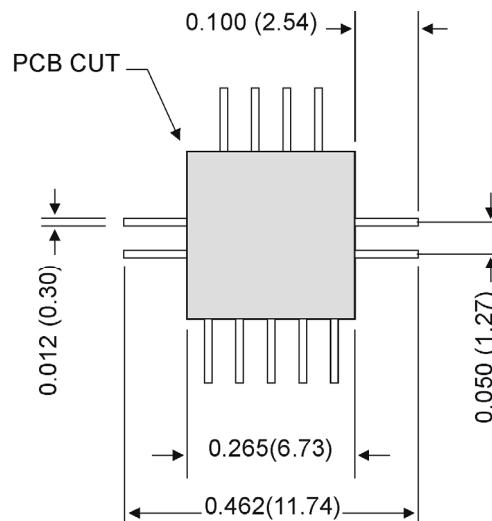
RTH050-HD footprint, dimensions shown in inches (mm).
